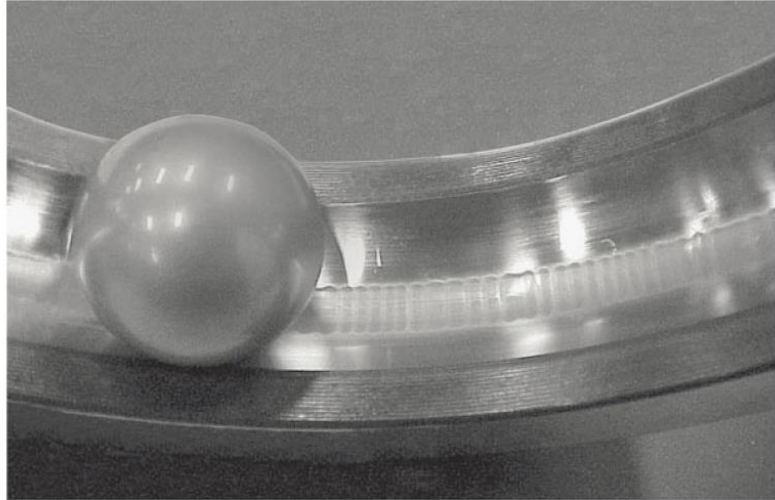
Bearing currents can cause “bearing fluting”, a rhythmic pattern on the bearing's races.
